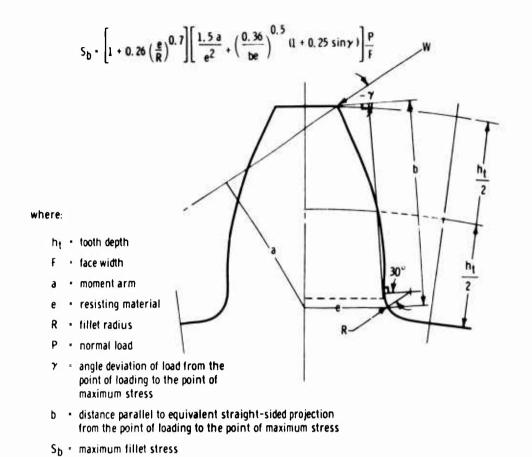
Heywood Construction and Gear Tooth Bending Stress Formula.
